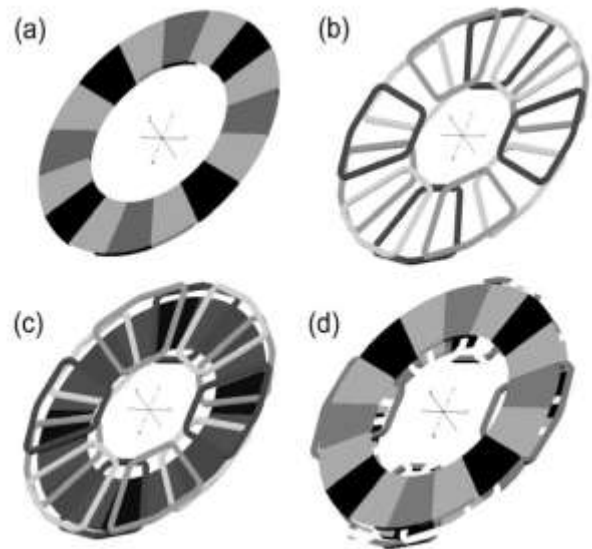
Construction of a five-phase, 8-pole AFPM brushless machines with PMs arranged in Halbach array: (a) PM ring; (b) stator winding; (c) one half of the twin rotor; (d) stator winding and complete twin rotor.
